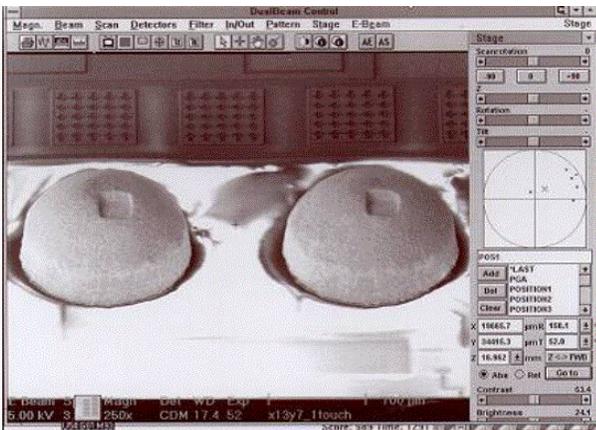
Product testing on solder bump utilizing a cascade pyramid probe.
